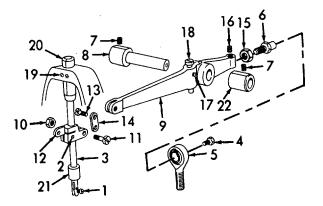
Needle Bar Drive Mechanism, Removal.
